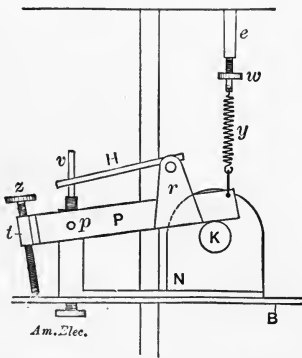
ELEVATION OF MECHANISM, COMPLETE.
